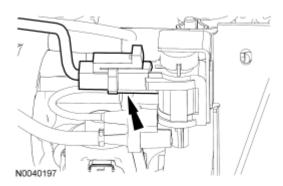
Locating AIR Valve Electrical Connector Courtesy of FORD MOTOR CO.
